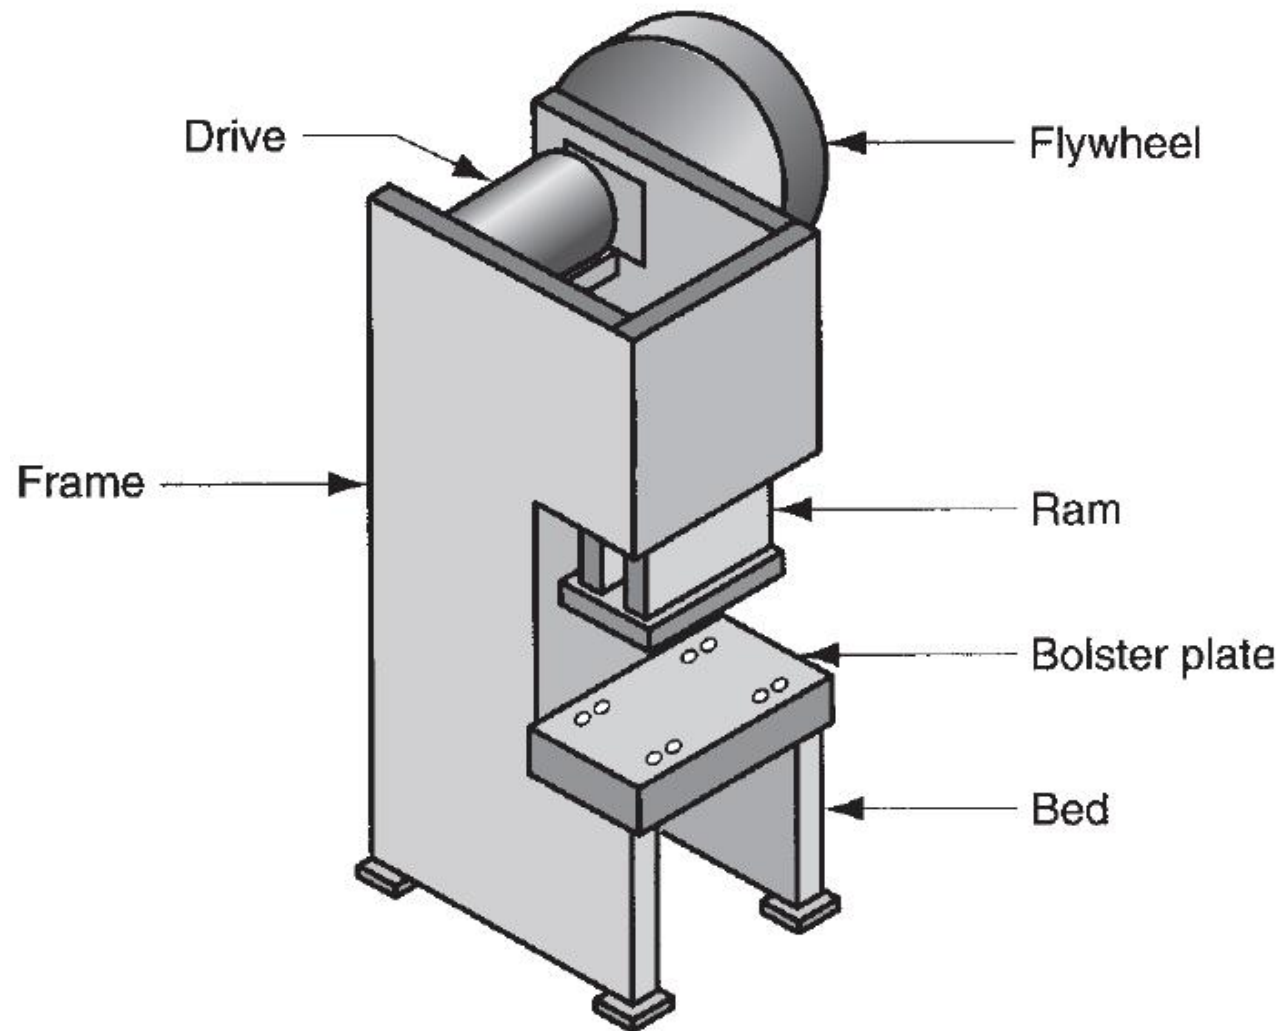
Components of a typical (mechanical drive) stamping press.
